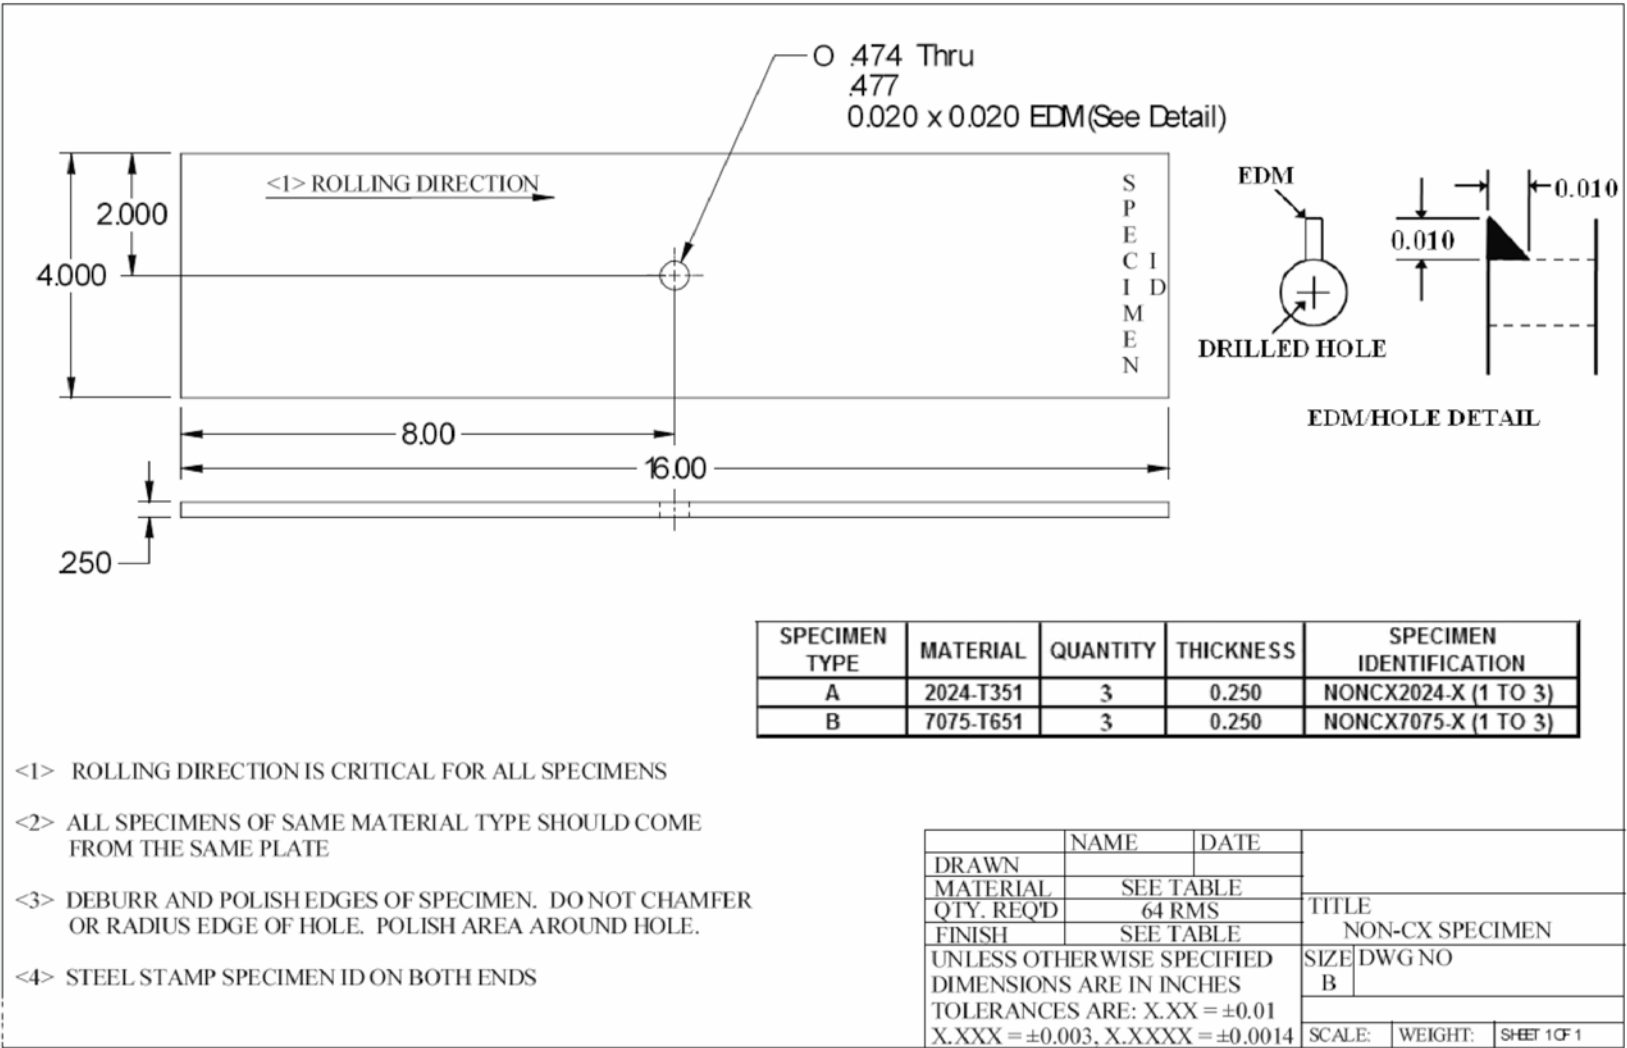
Manufacturing drawing for noncold expanded baseline specimens.
